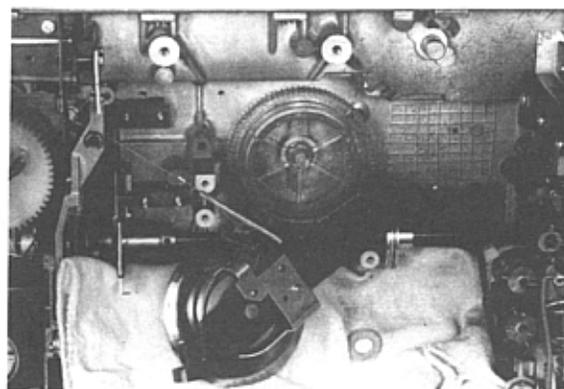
CHECK and CLEAN GEARS and BEARING
